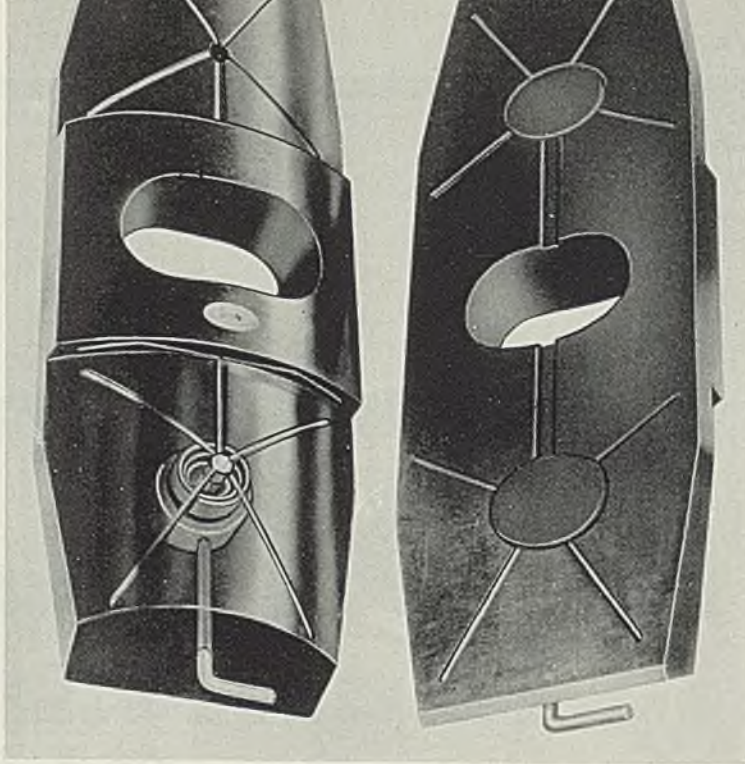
(Left)—phantom view of compression spring and button in slipper. Right, buttons are held flush with surface of slipper by locking pins, which are withdrawn after making the installation
